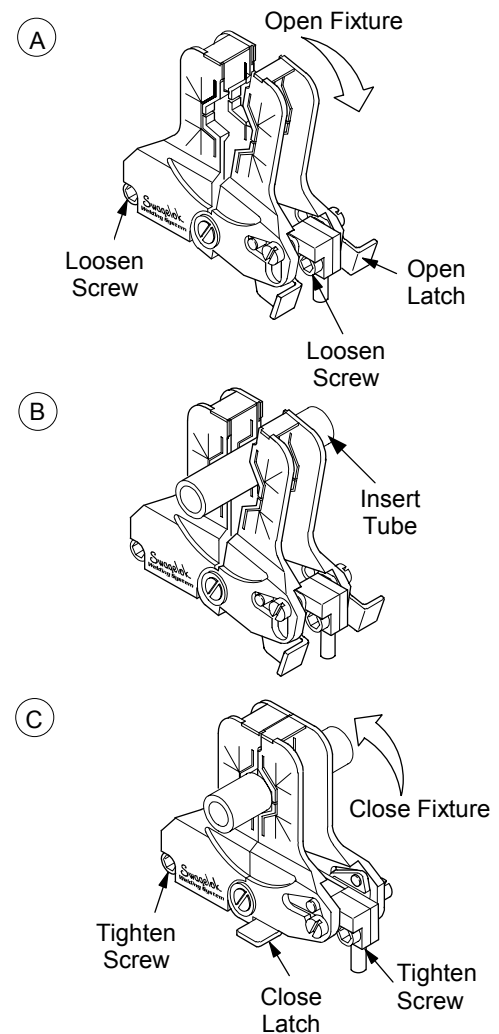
Aligning the Tubing in the Series 4 Micro Weld Head Fixture
